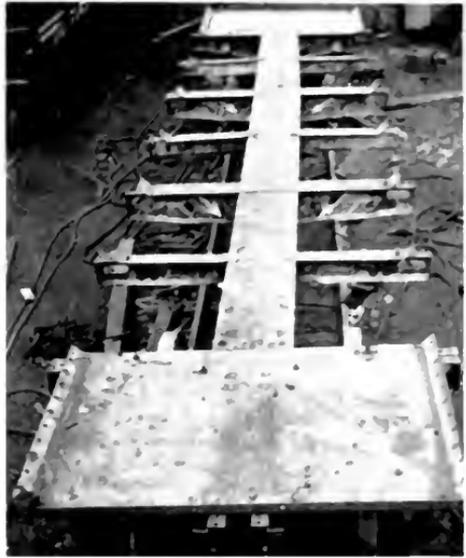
Part of the Welding Machine Over the Center of the Plate.
